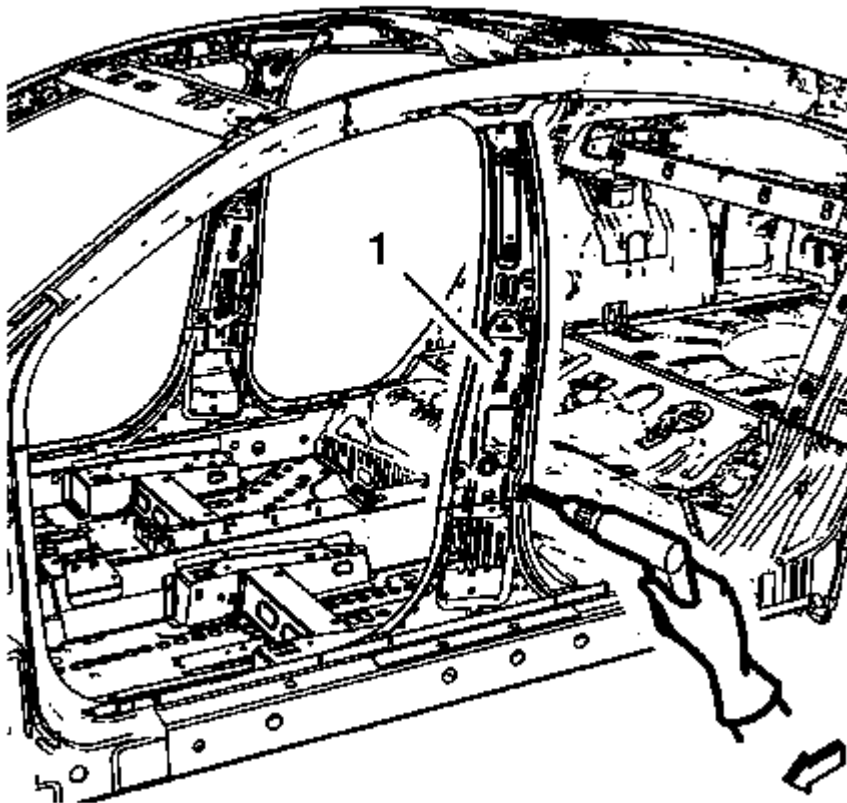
Drilling Factory Welds From Lower Center Pillar Inner Panel
